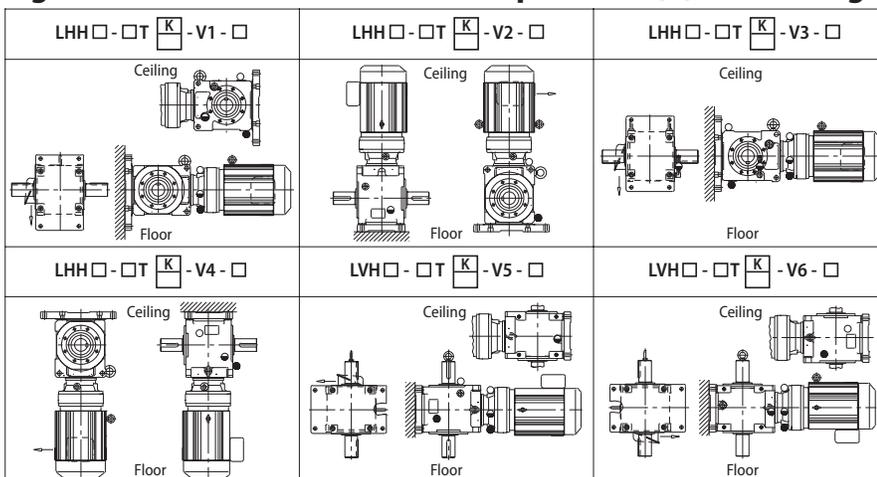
Solid Output Shaft Right (R) – Mounting Foot Bottom
